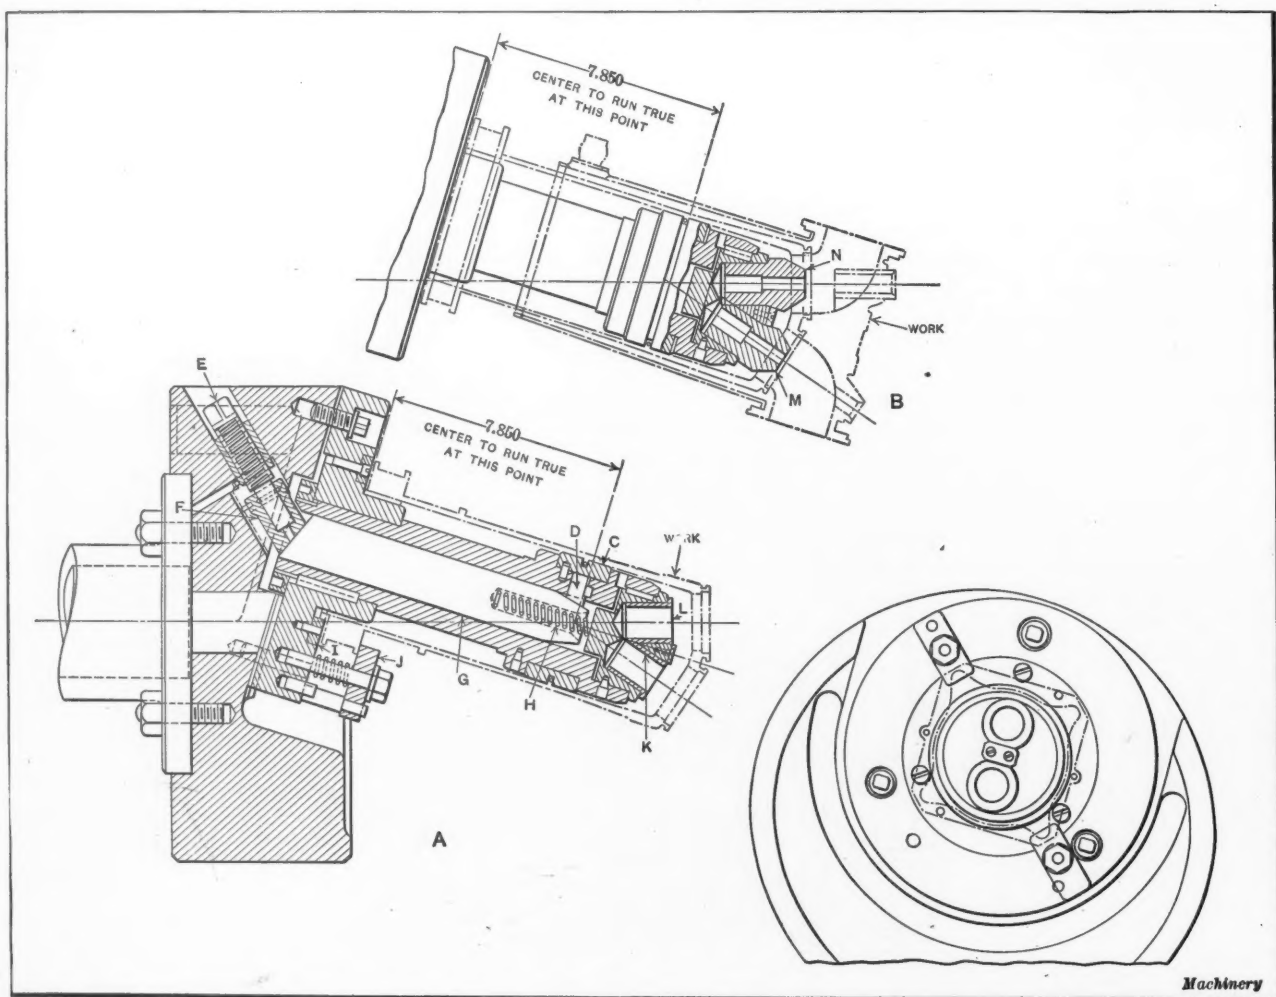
Special Indexing Fixture provided for machining the Holes in the Cylinder Head at an Angle with the Center Line of the Cylinder
